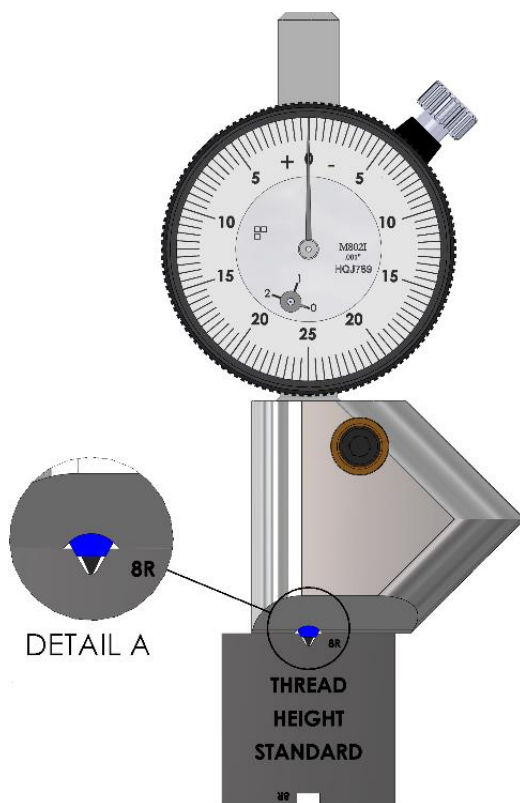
External Thread Height Gauge on Setting Standards (8R and 10R Thread Height Gauge on Block)
